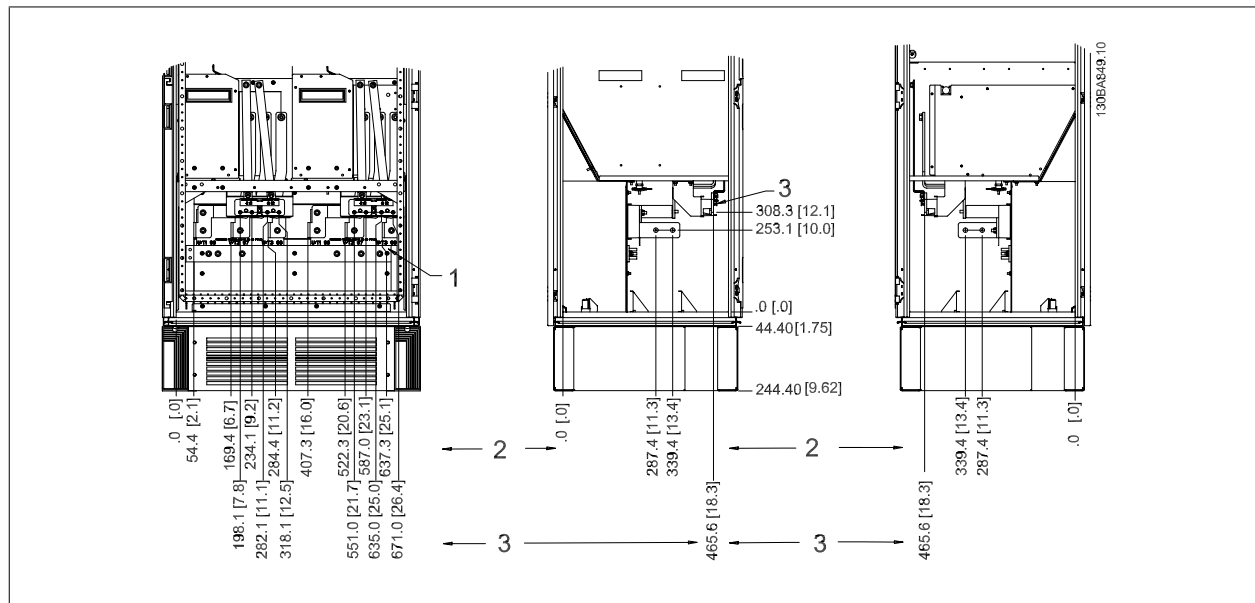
Terminal locations - Inverter Cabinet - F1 and F3 (front, left and right side view)
